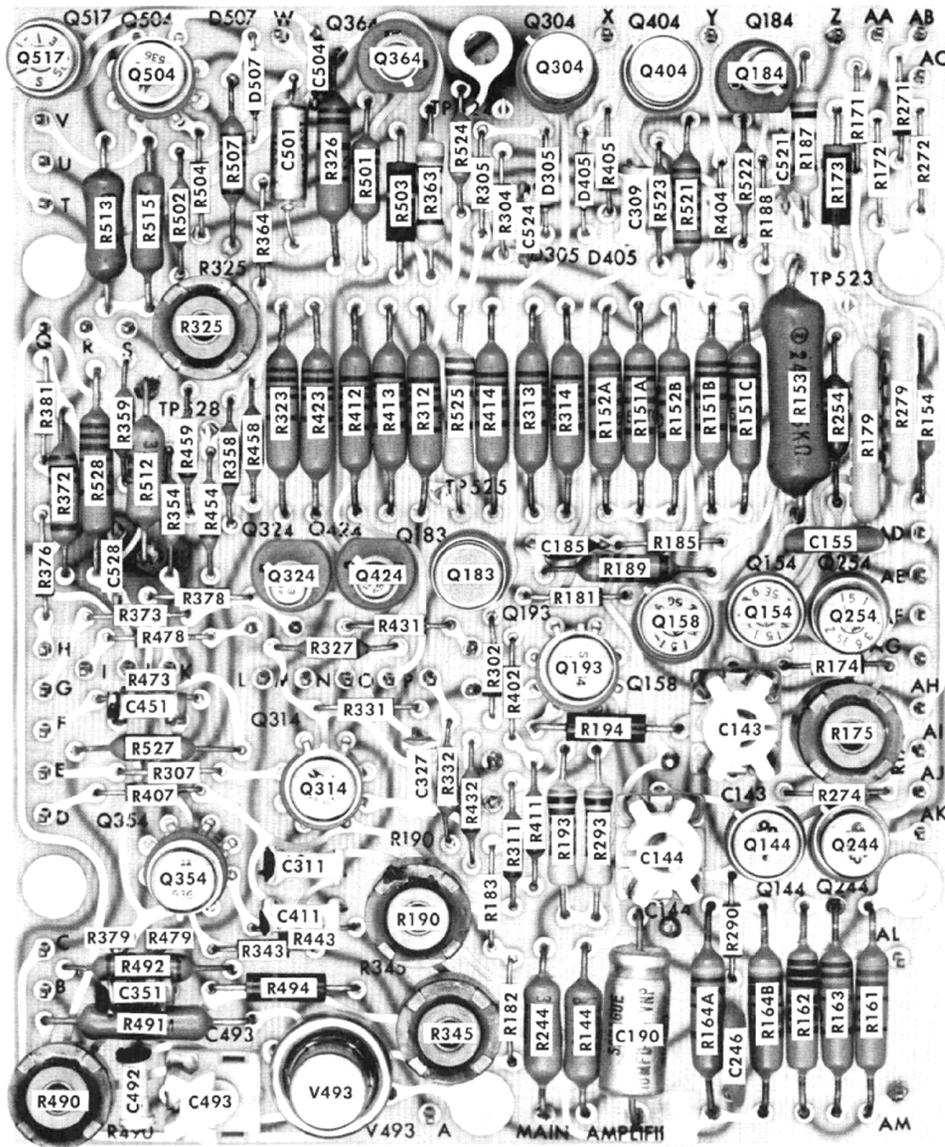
Top view of Main Amplifier etched-wiring board showing component circuit numbers.
